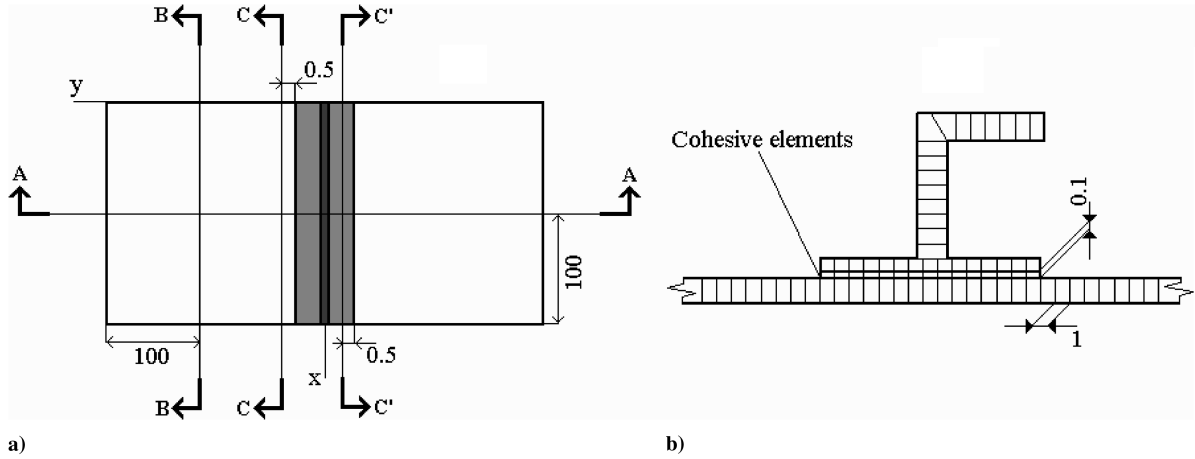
Plate geometry: a) sections of interest, and b) typical mesh size at the bond line. Dimensions in mm.
